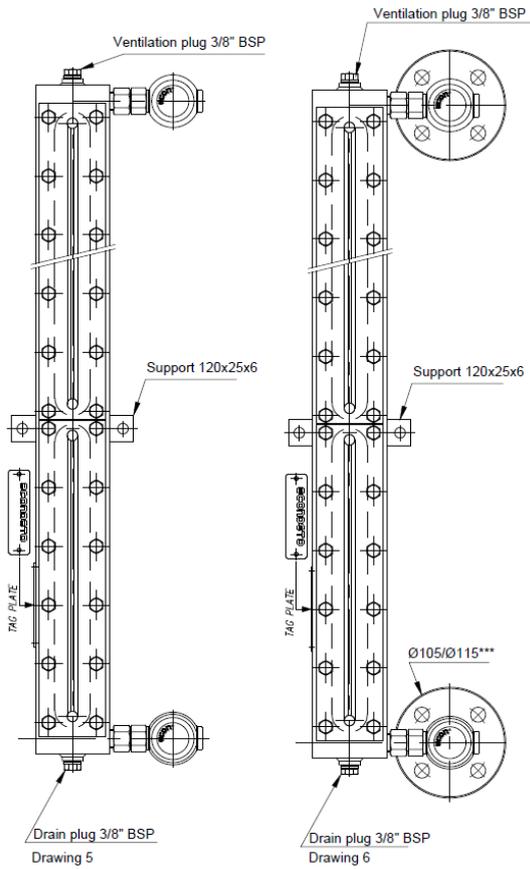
F with one push-button valve, flanged connection on the right side, on the left side is also possible.
